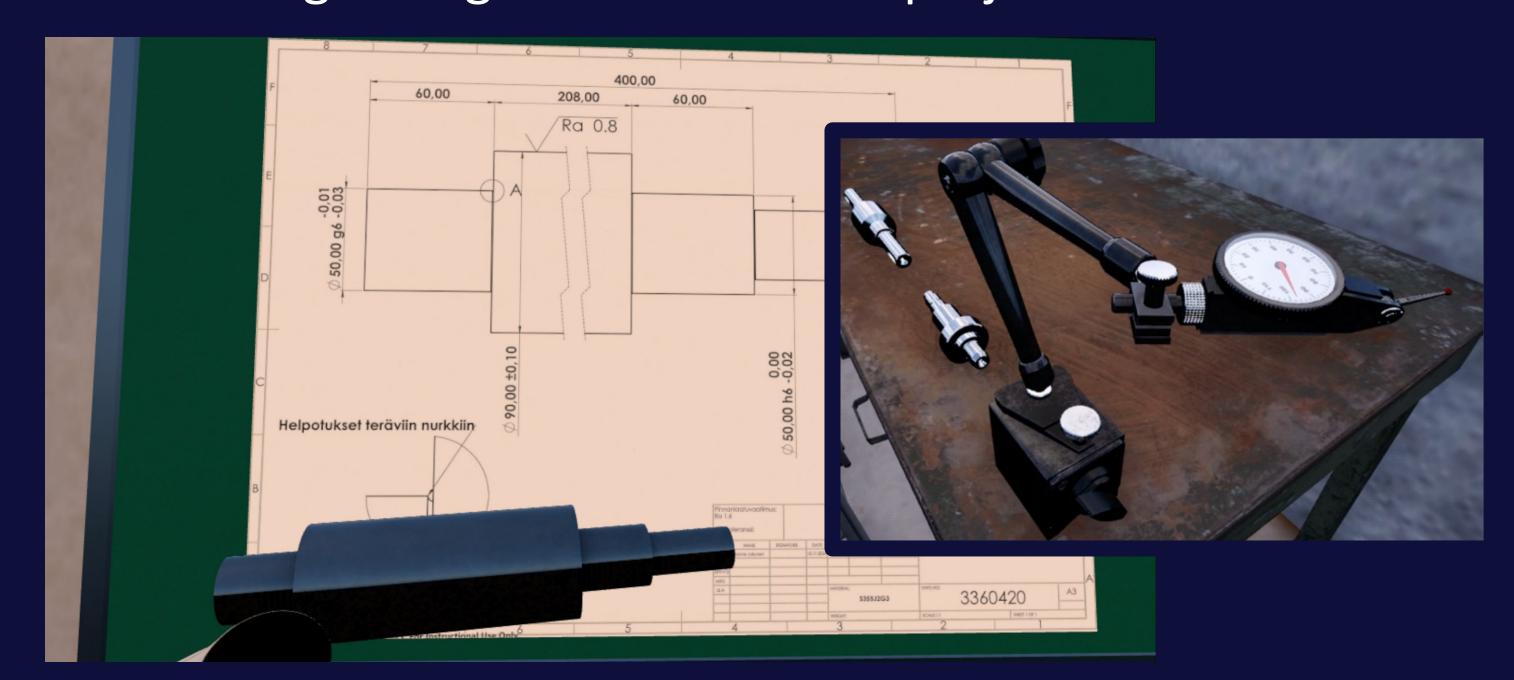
Real technical drawings, workpieces and measurements anchor tasks in authentic constraints.
